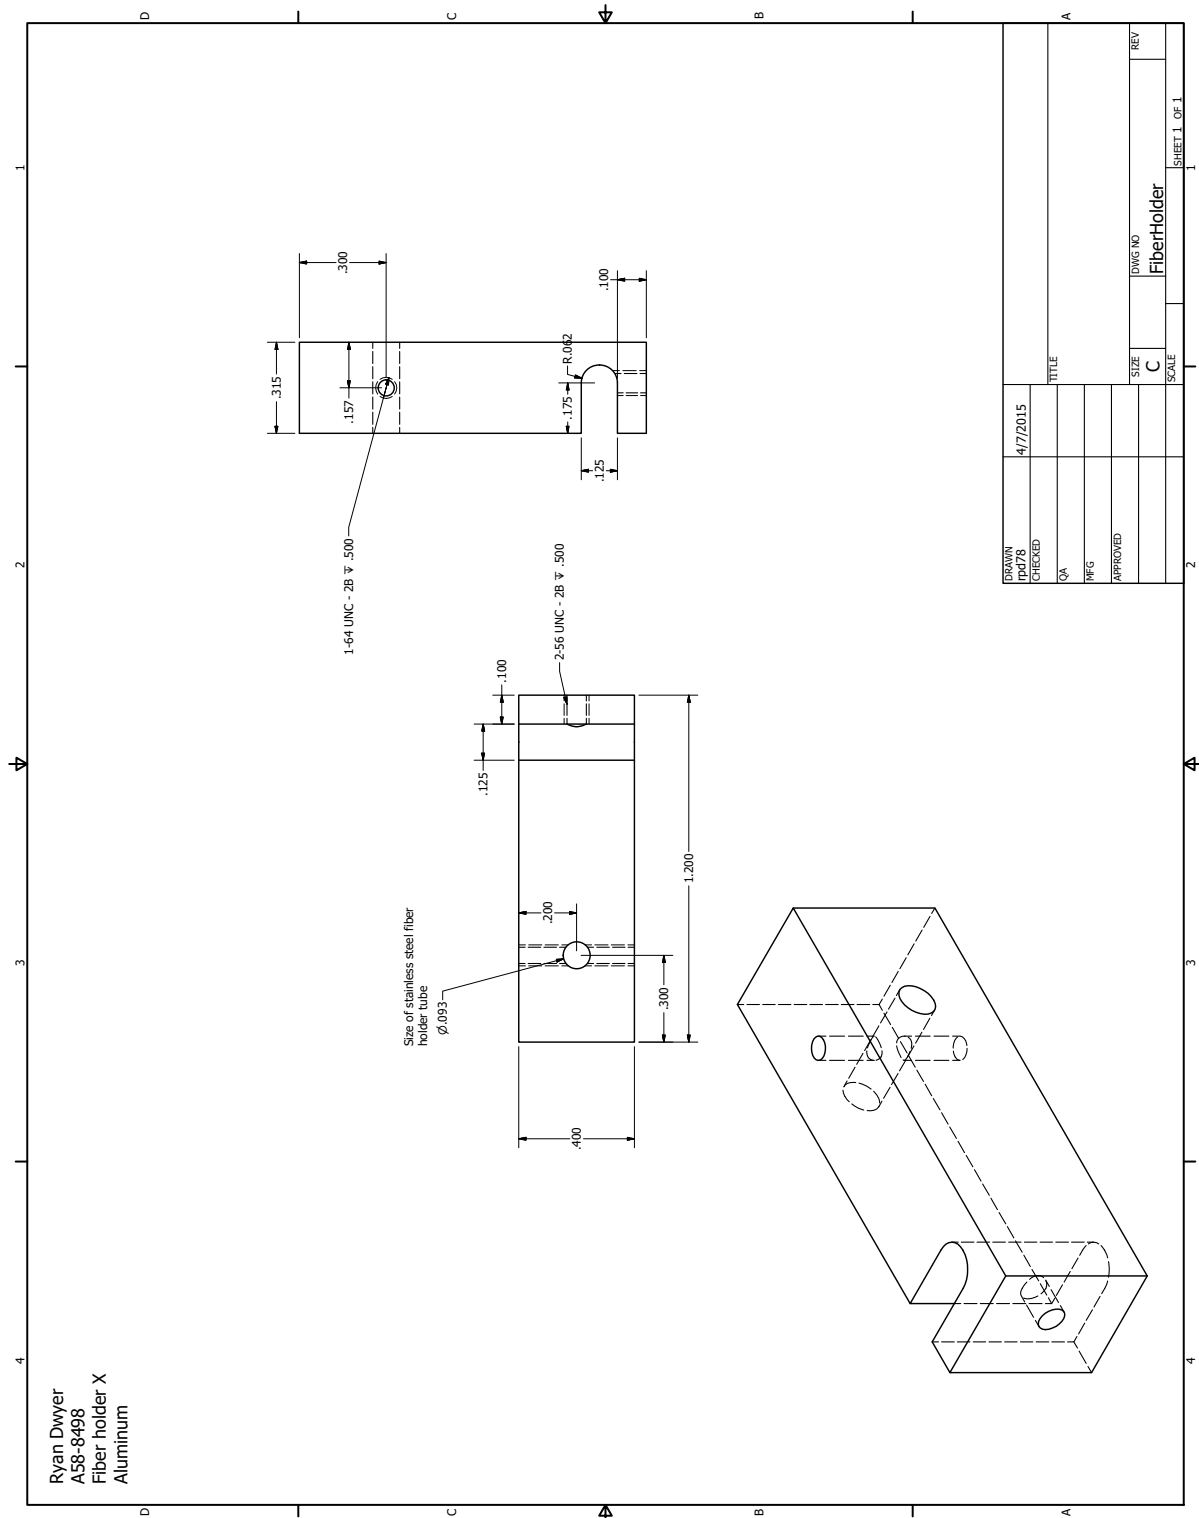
Aluminum piece for holding an extra fiber optic cable in a metal jacket.
